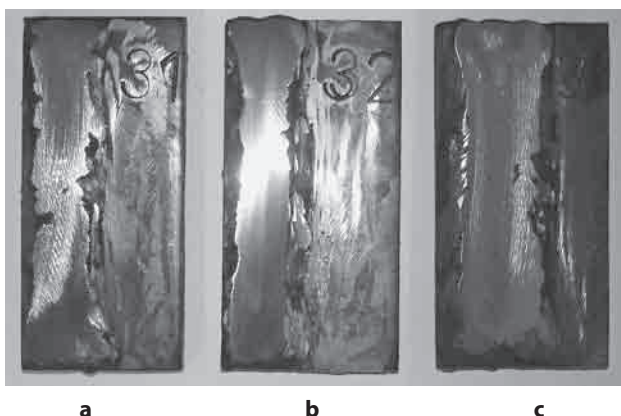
General view of the tests carried out by loading with welding after five cycles of wear testing (25 minutes), test 3: a – test 3-1; b – test 3-2; c – test 3-3
